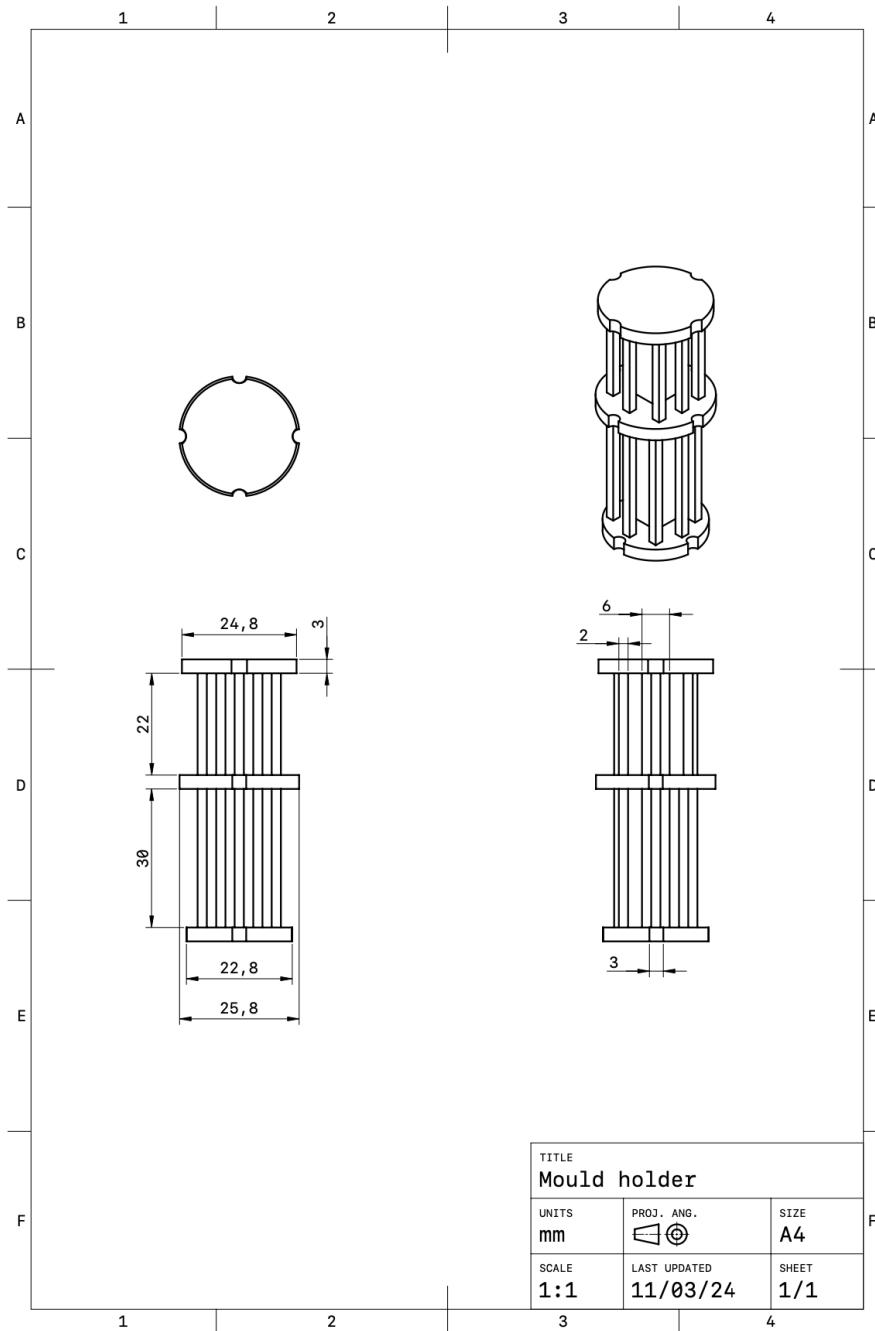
Technical drawing of the holder designed for a 50 mL falcon tube for stabilization during centrifugation.
